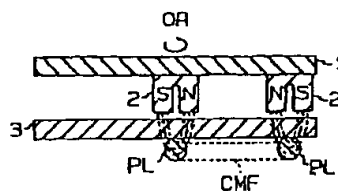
Cross-sectional view illustrating the relative positions of the magnet assembly and target in the conventional device.
